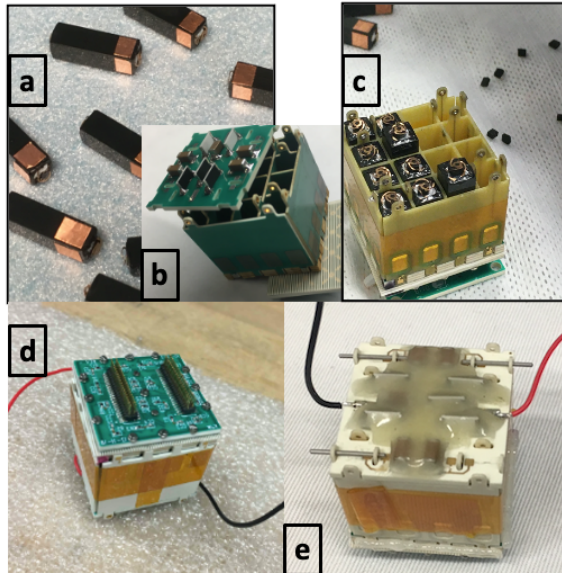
Module components: a – CdZnTe bars with sensitive pads attached; b – open module with HV cathode board; c – module partially filled with the bars; d – assembled module from the ASIC (anode) side; e – fully ready module, shown from the HV side
